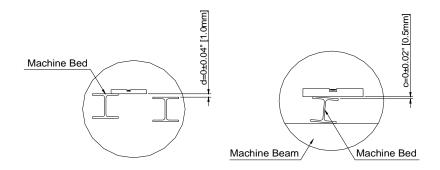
MACHINE BEAM INSTALLATION
